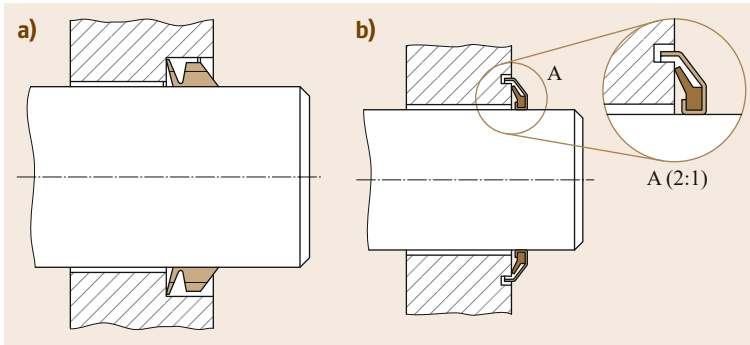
,b Axial shaft seals: V-ring (a) and gamma ring (b)
